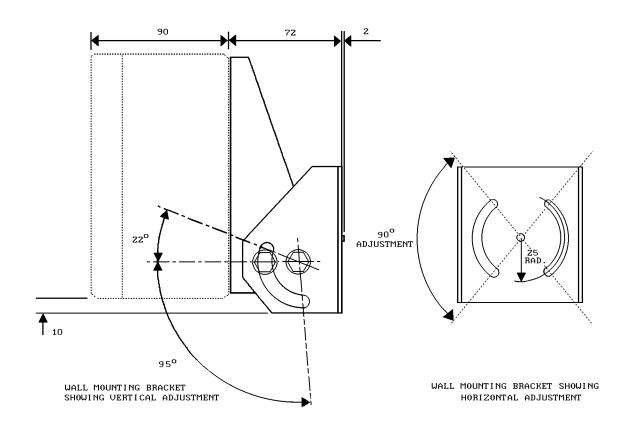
Mounting Bracket [Type B Not Stockcoded]
